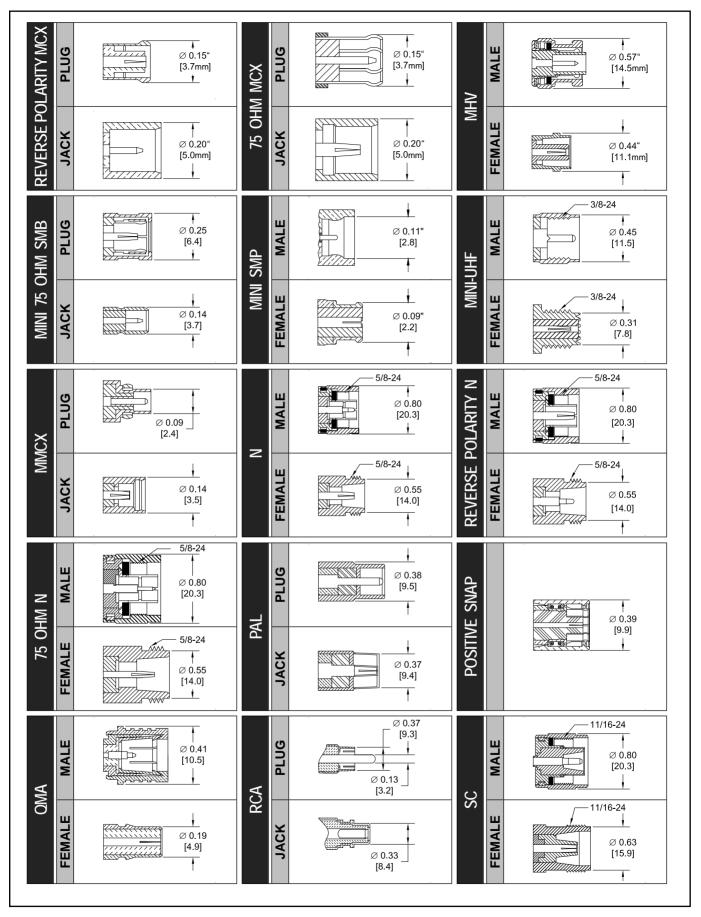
C – Connector side views, set 3 of 4. (Courtesy of Pasternak)
